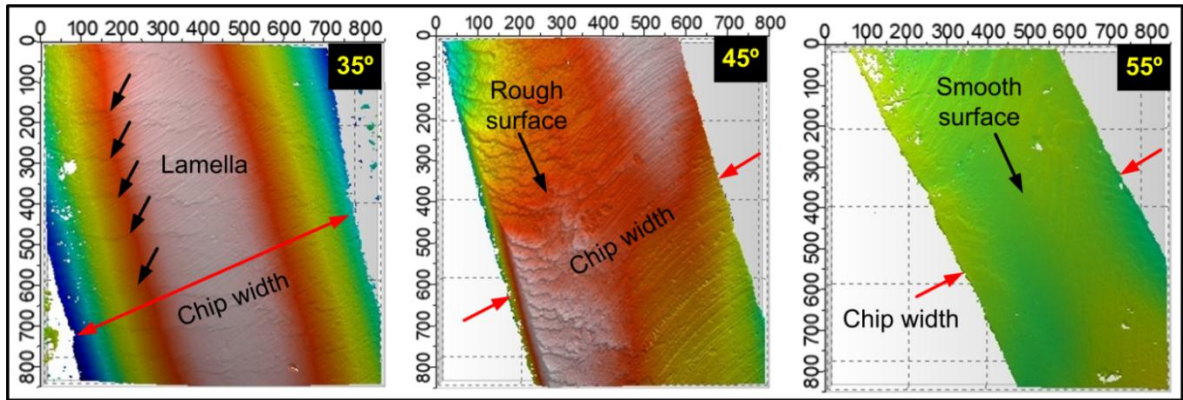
3-D profile of the back surface of the chip obtained by machining using different helix angles
